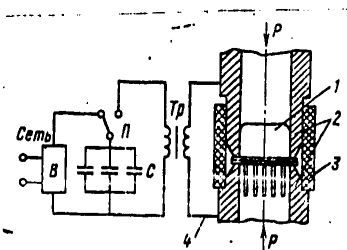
System for spot capacitor welding. 1 -- case; 2 -- electrodes; 3 -- sleeve; 4 -- electric network of the welder; P -- compressive force.
